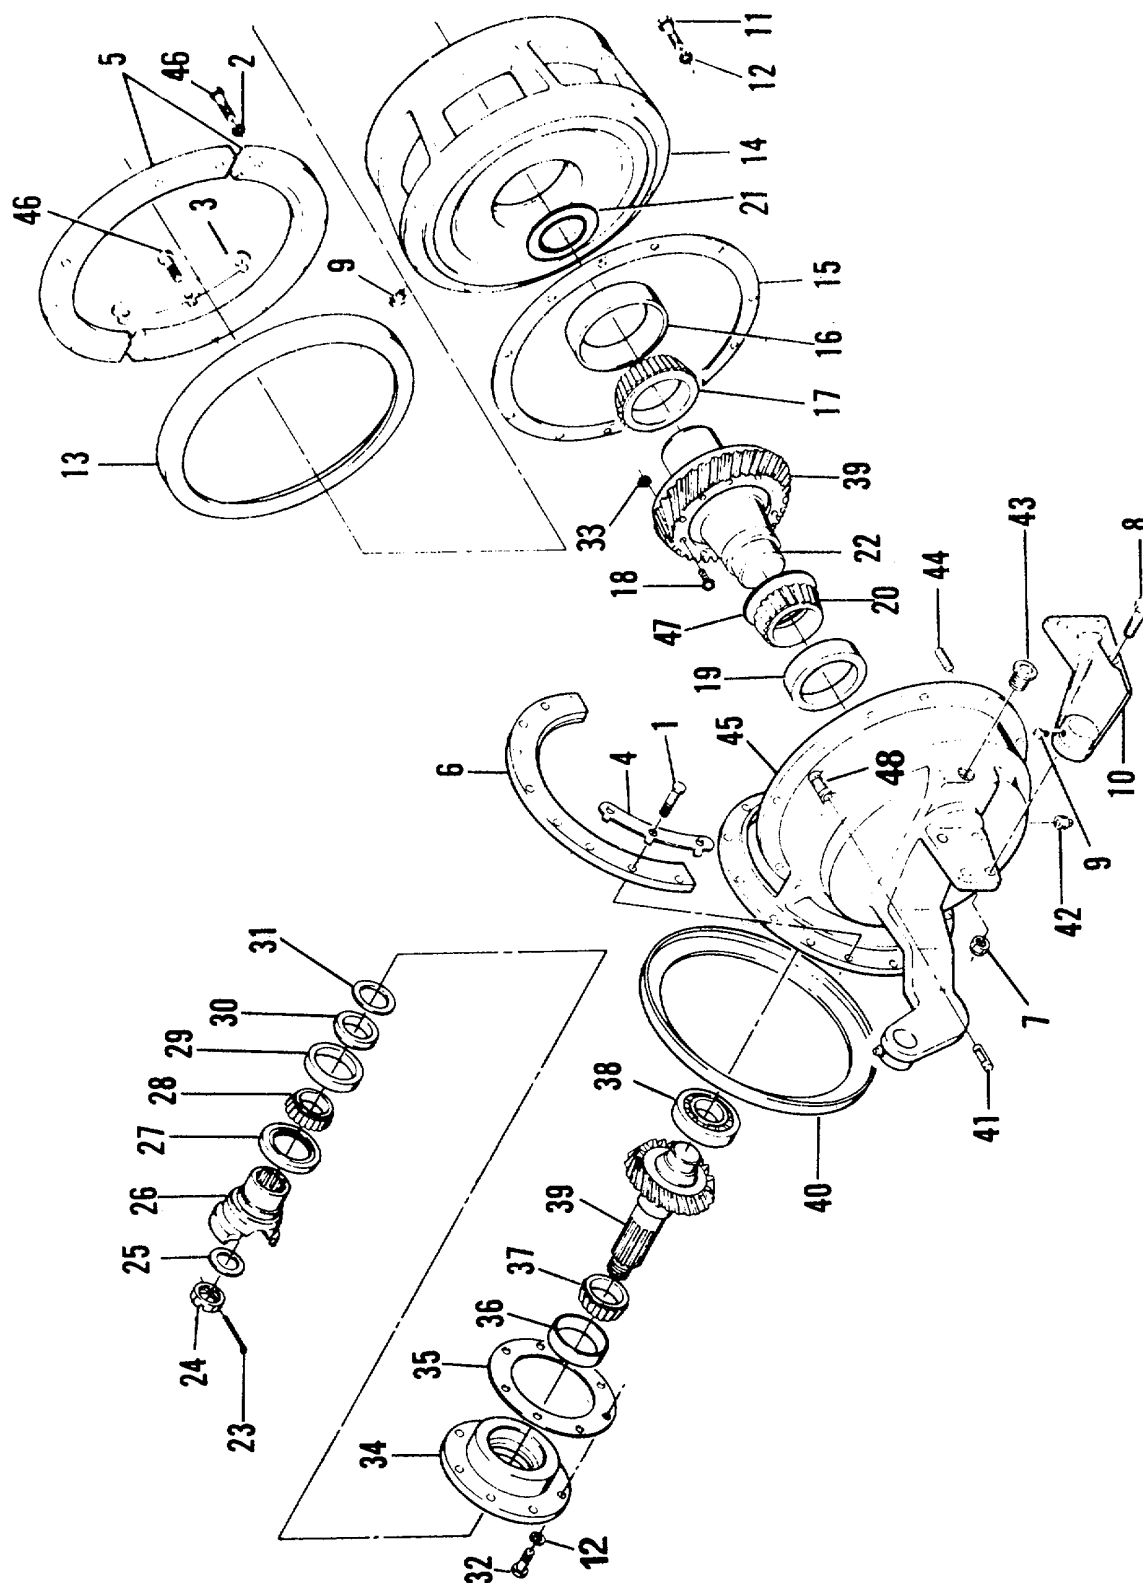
RIGHT ANGLE DRIVE ASSEMBLY
